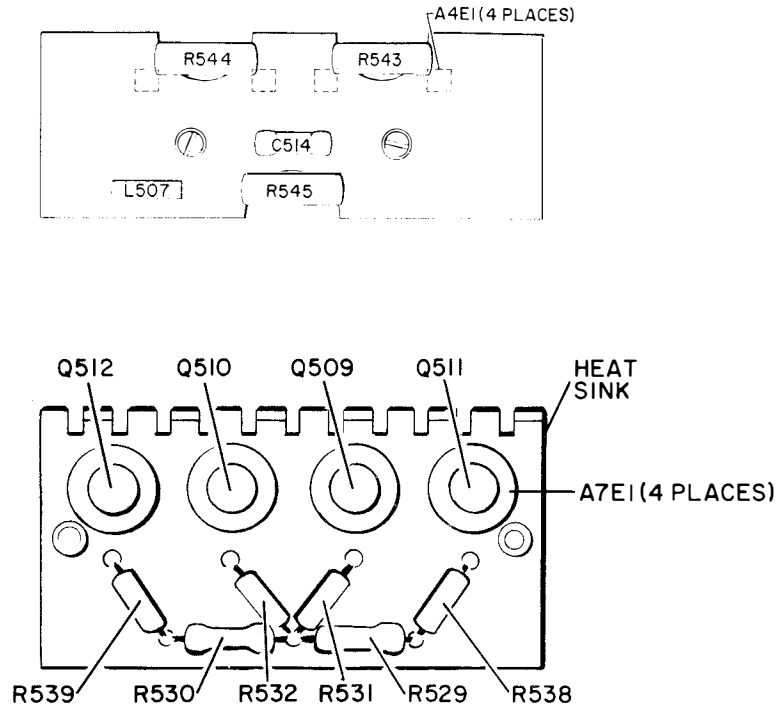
Output Circuit Board A2A4, and Heat Sink Output Assembly A2A7, Location of Parts
